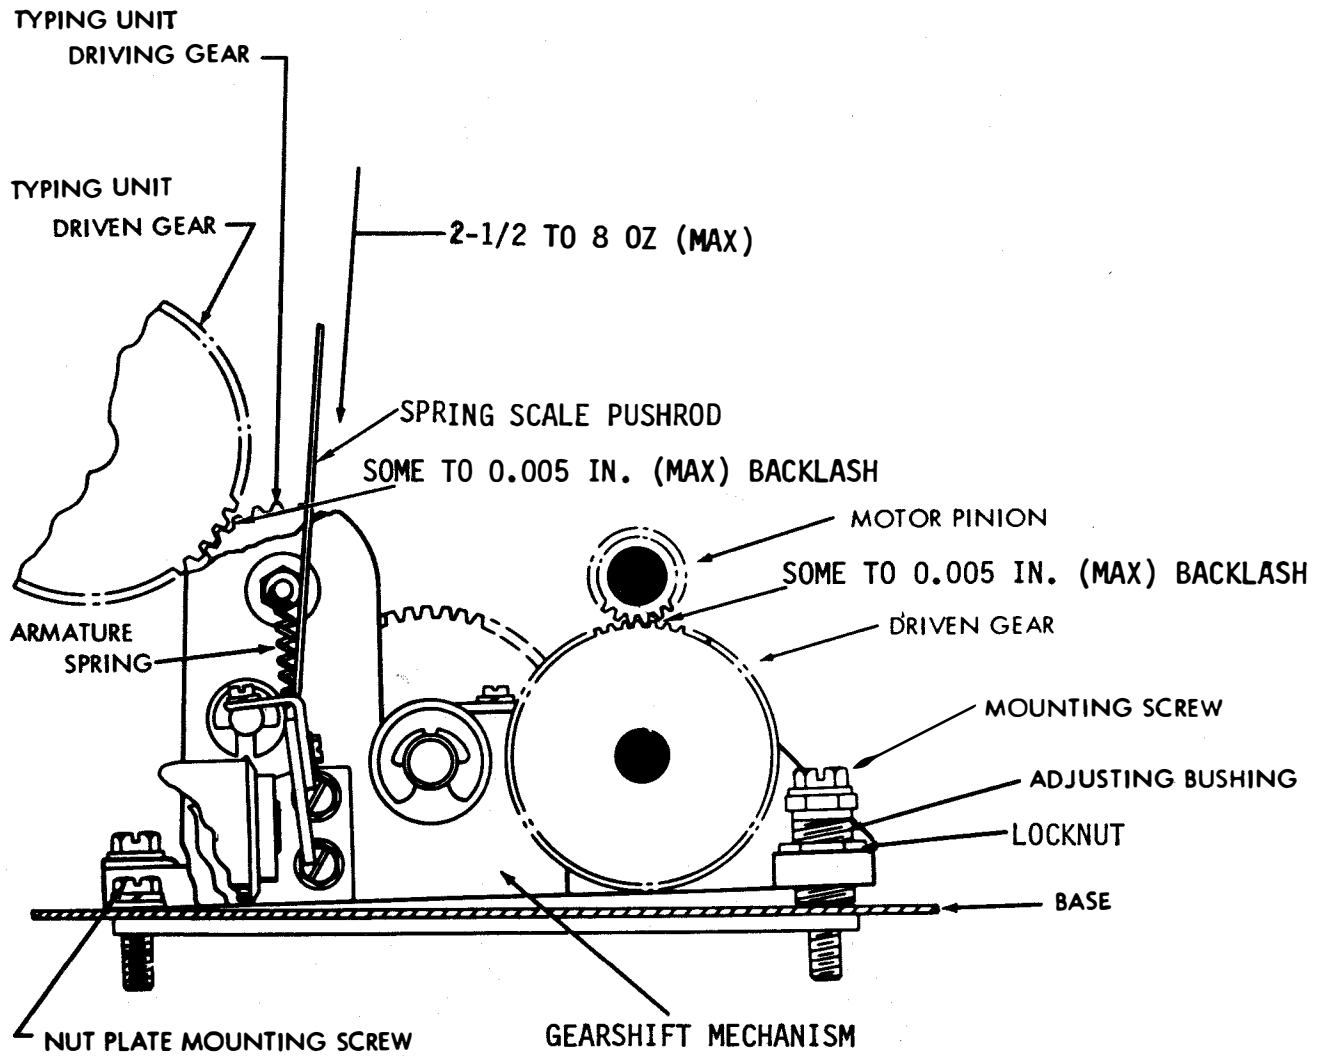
Gearshift Mechanism and Magnet Armature Spring
